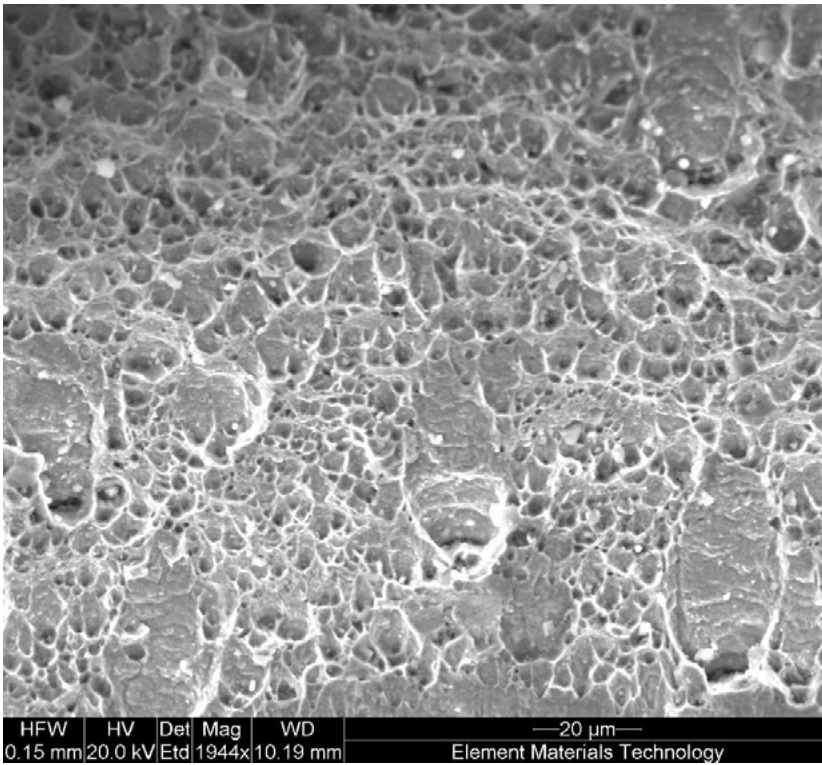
Internal bellow plate width section: dimple morphology indicative of ductile fracture.
